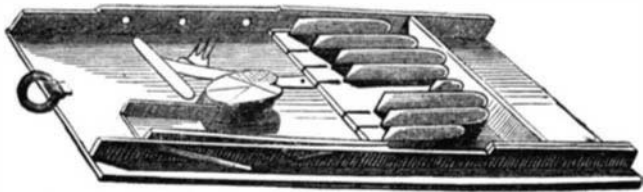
FORM FOR CUTTING GLOVE BLANKS.
